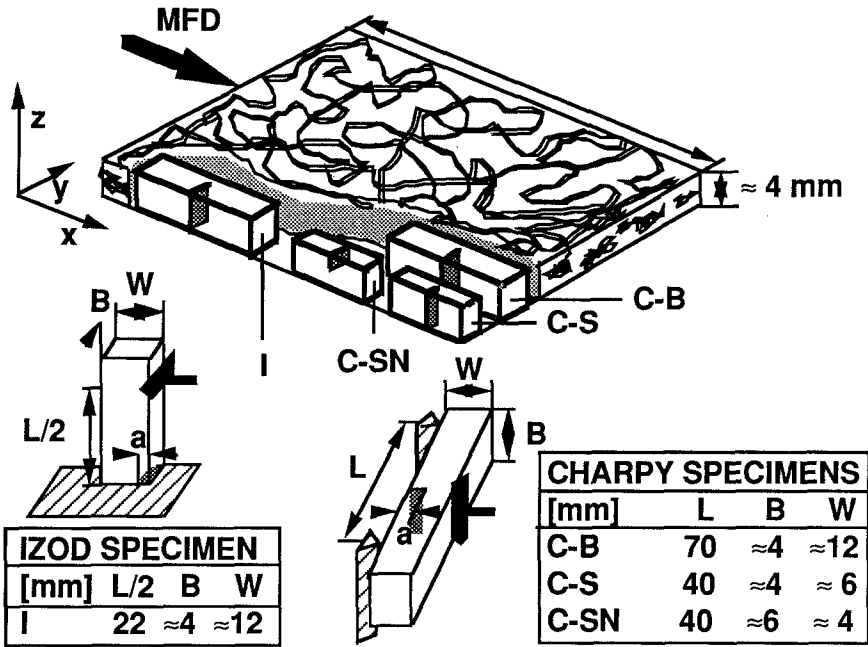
Machining, notching, dimension and impact mode of the specimens used
